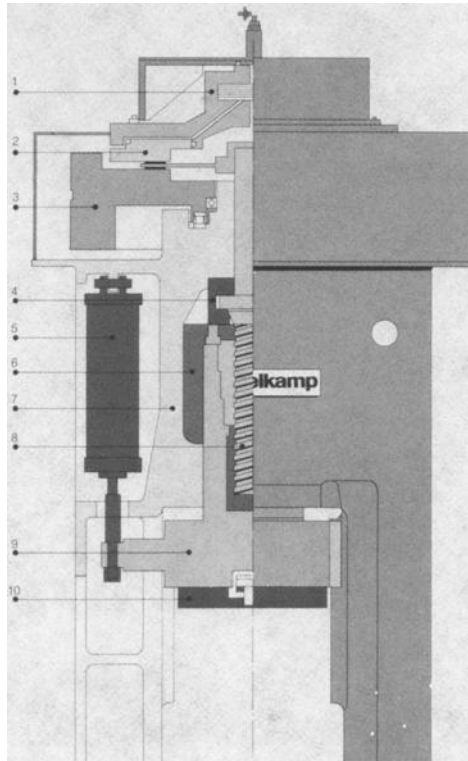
Sketch of internal design of screw press. (Courtesy of Schirmer-Plate-Siempelkamp Hydraulic Presses.)
